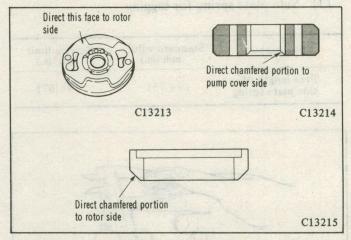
Installing Direction of Side Plate, Rotor and Collar
